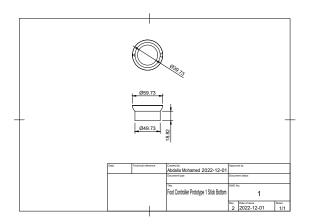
Foot Controller Prototype 1 Bottom Stick Technical Drawing
